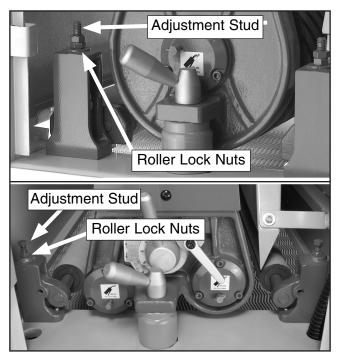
Pressure roller adjustment locations for platen and drum type sanders.
